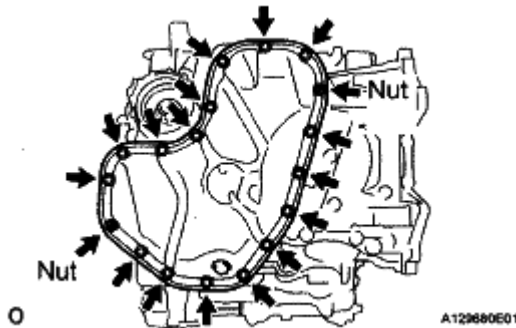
Identifying Oil Pan With Bolts And Nuts
